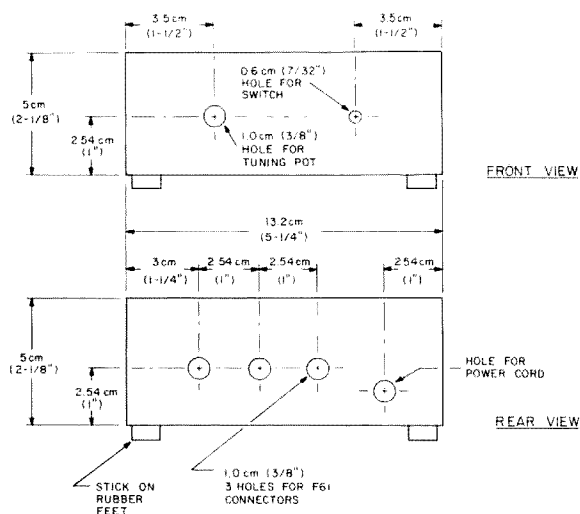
Front and rear panel layout of the power supply/tuning unit chassis.
